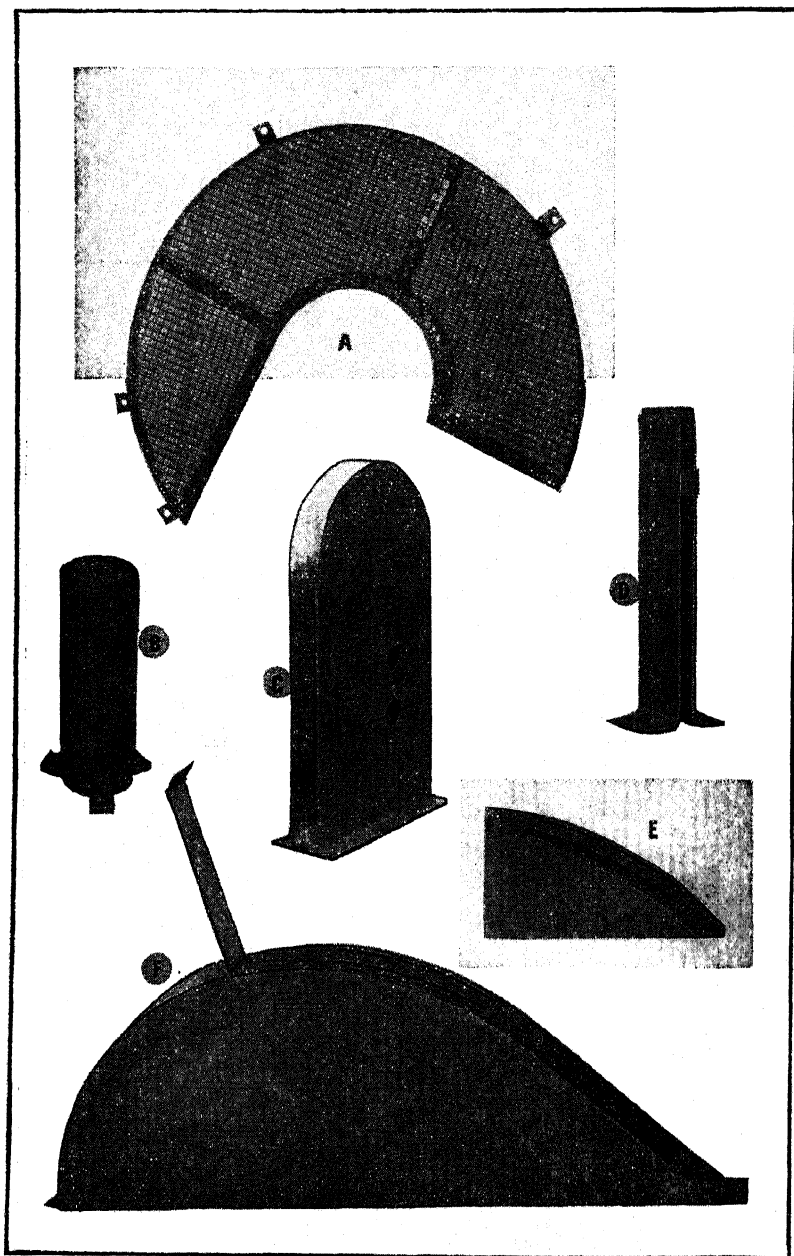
COVERS—(A) Fanguard for engine. (B) Cover guard for clutch shaft. (C) Chain guard on ice slinger. (D) Band saw guard. (E) Sliding door in gear guard for greasing. (F) Drum gear guard for crawler shovel.
